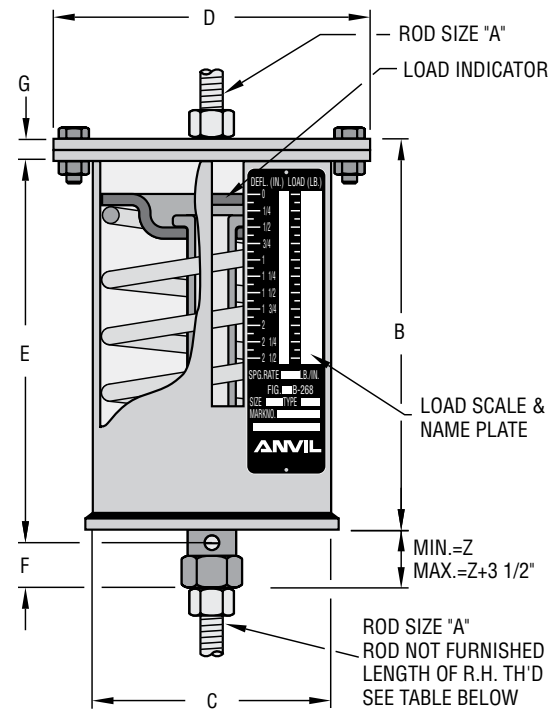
, FIG. C-268 TYPE A: WEIGHT (LBS) • DIMENSIONS (IN)
